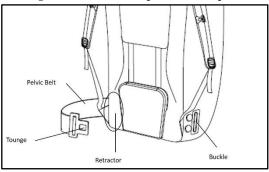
Draft of a roll-up pelvic belt incorporating a belt with tongue, a buckle and a retractor integrated in the backpack.
